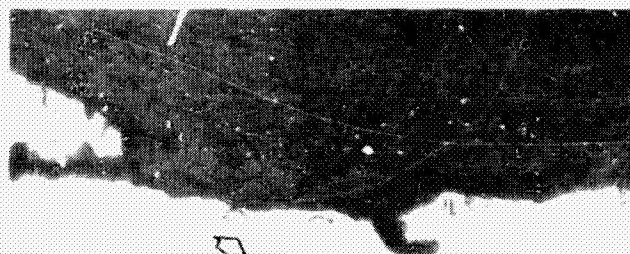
FRACTURE SURFACE OF WELD SAMPLE 2-11
